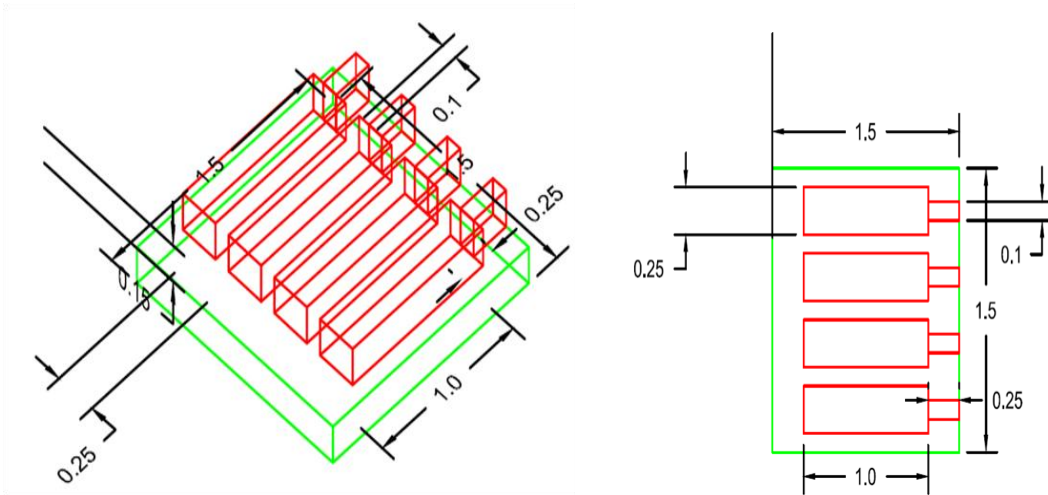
, (a) AutoCAD home view of the mold for PDMS lower cladding consisting of features for sockets and grooves (b) AutoCAD top view of the mold for PDMS lower cladding
